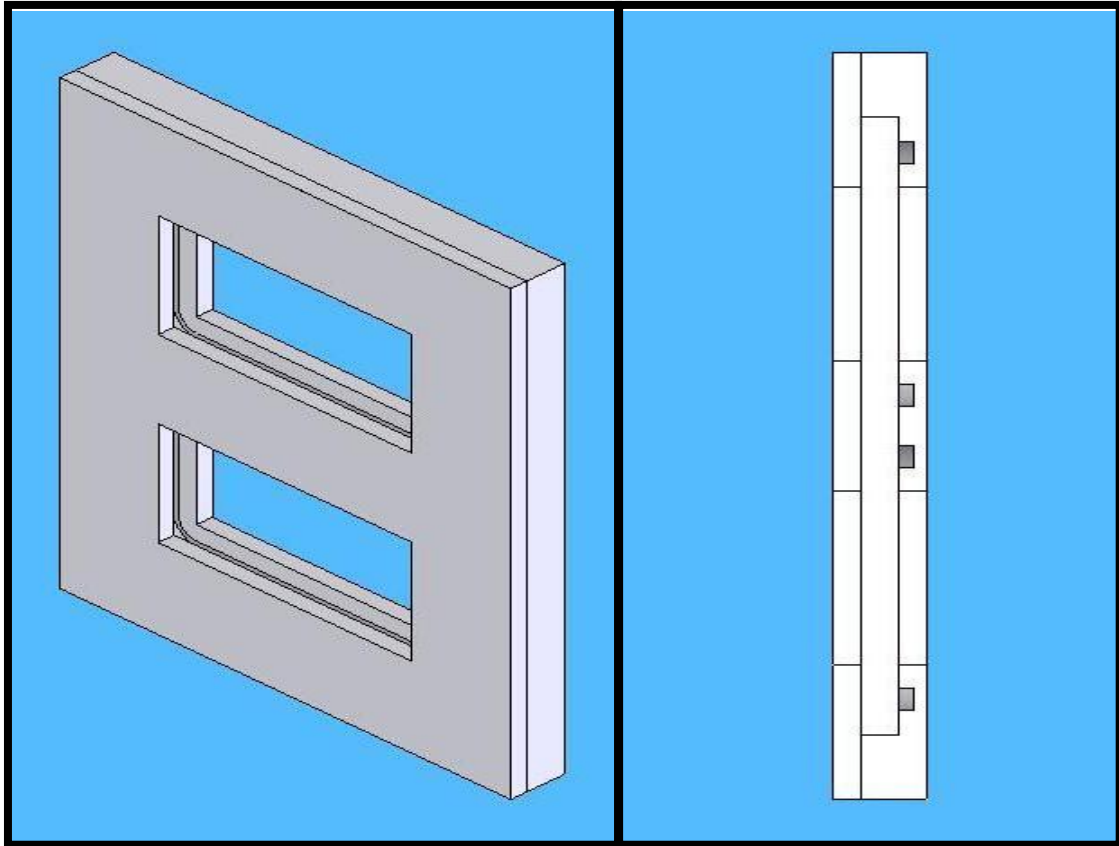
Solidworks assembly drawings, isometric view (left) and sectioned side view (right), of Seat Plate and Backing Plate for side window.
